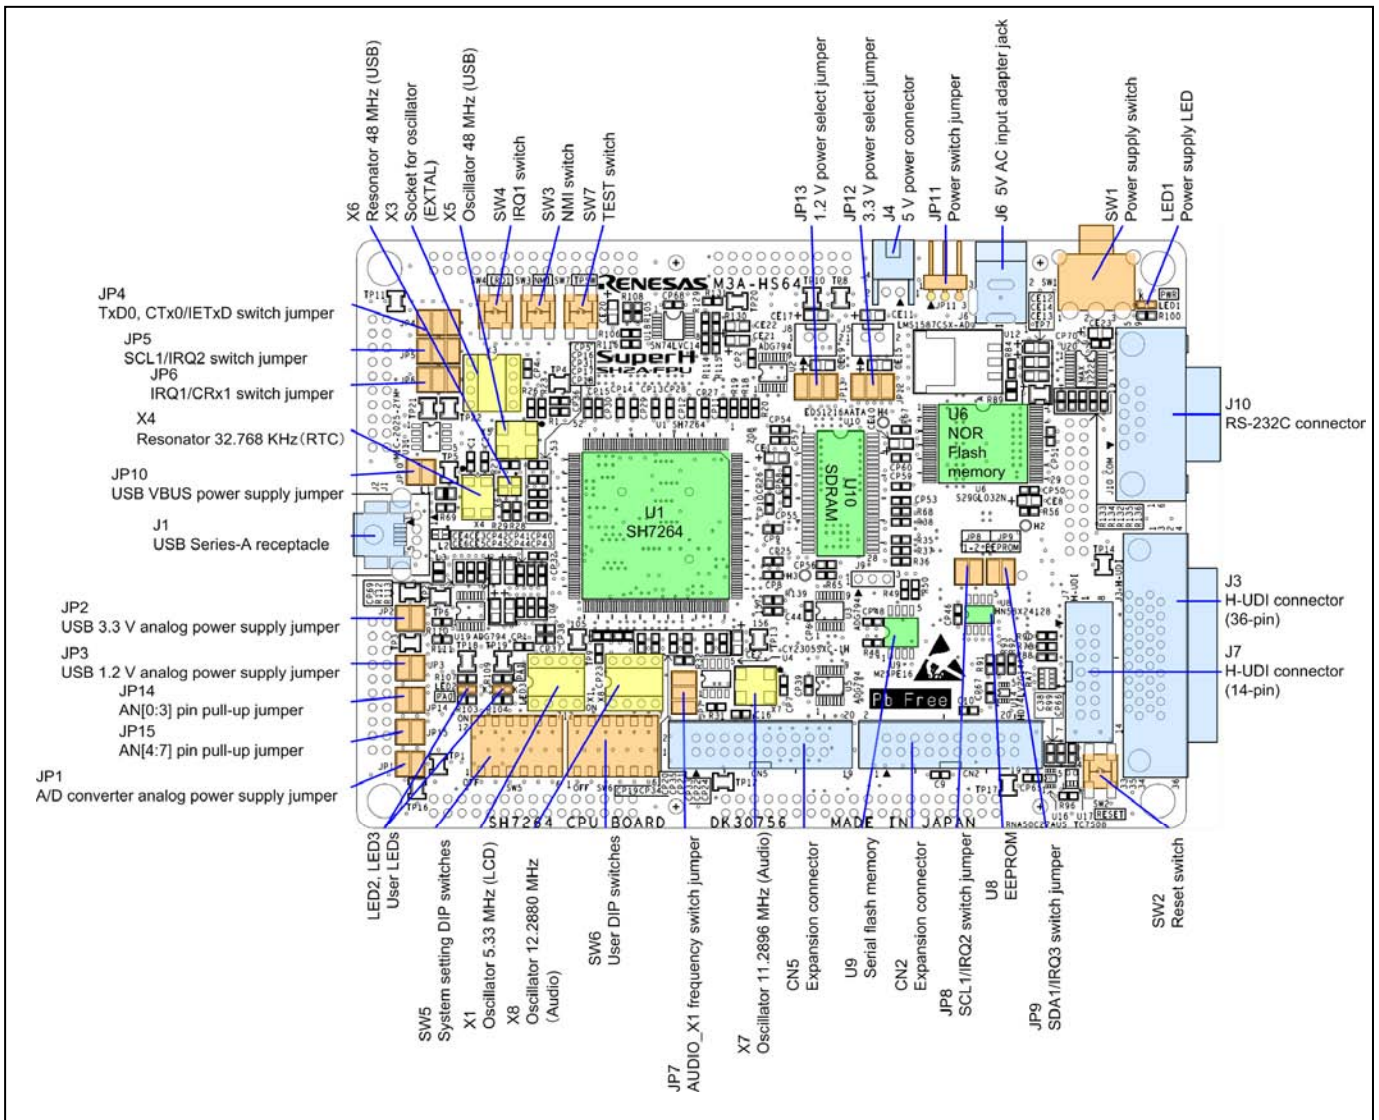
M3A-HS64 Component Layout and Placement (Top View of the Component Side)
